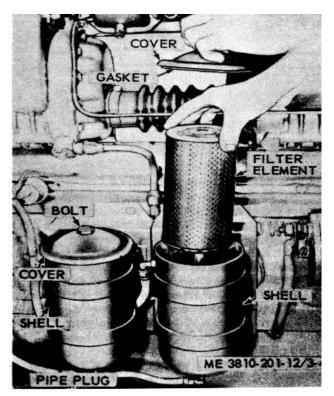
Engine oil filter service for model 687C-18-ES.
